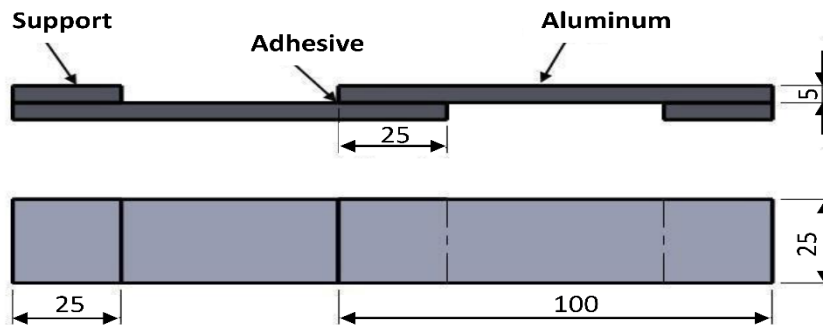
Dimension and joining details of the adhesively bonded SLJs.
